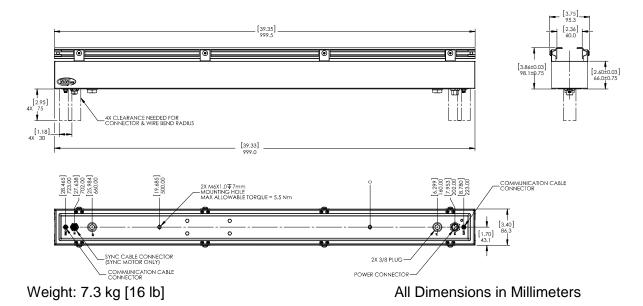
1000 mm Air-cooled RS-422 Motor Mechanical Drawing
